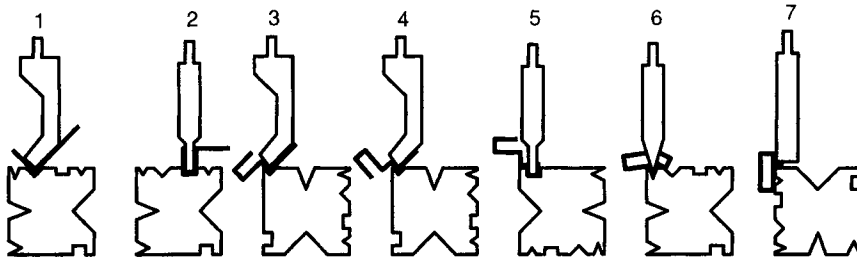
Press brake bending of sheet to fabricate a closed rectangular section in seven steps.
